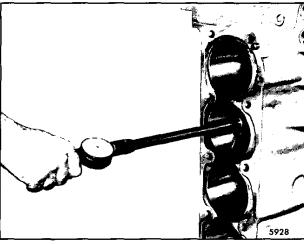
Checking Cylinder Bore with Tool J 5347-B
